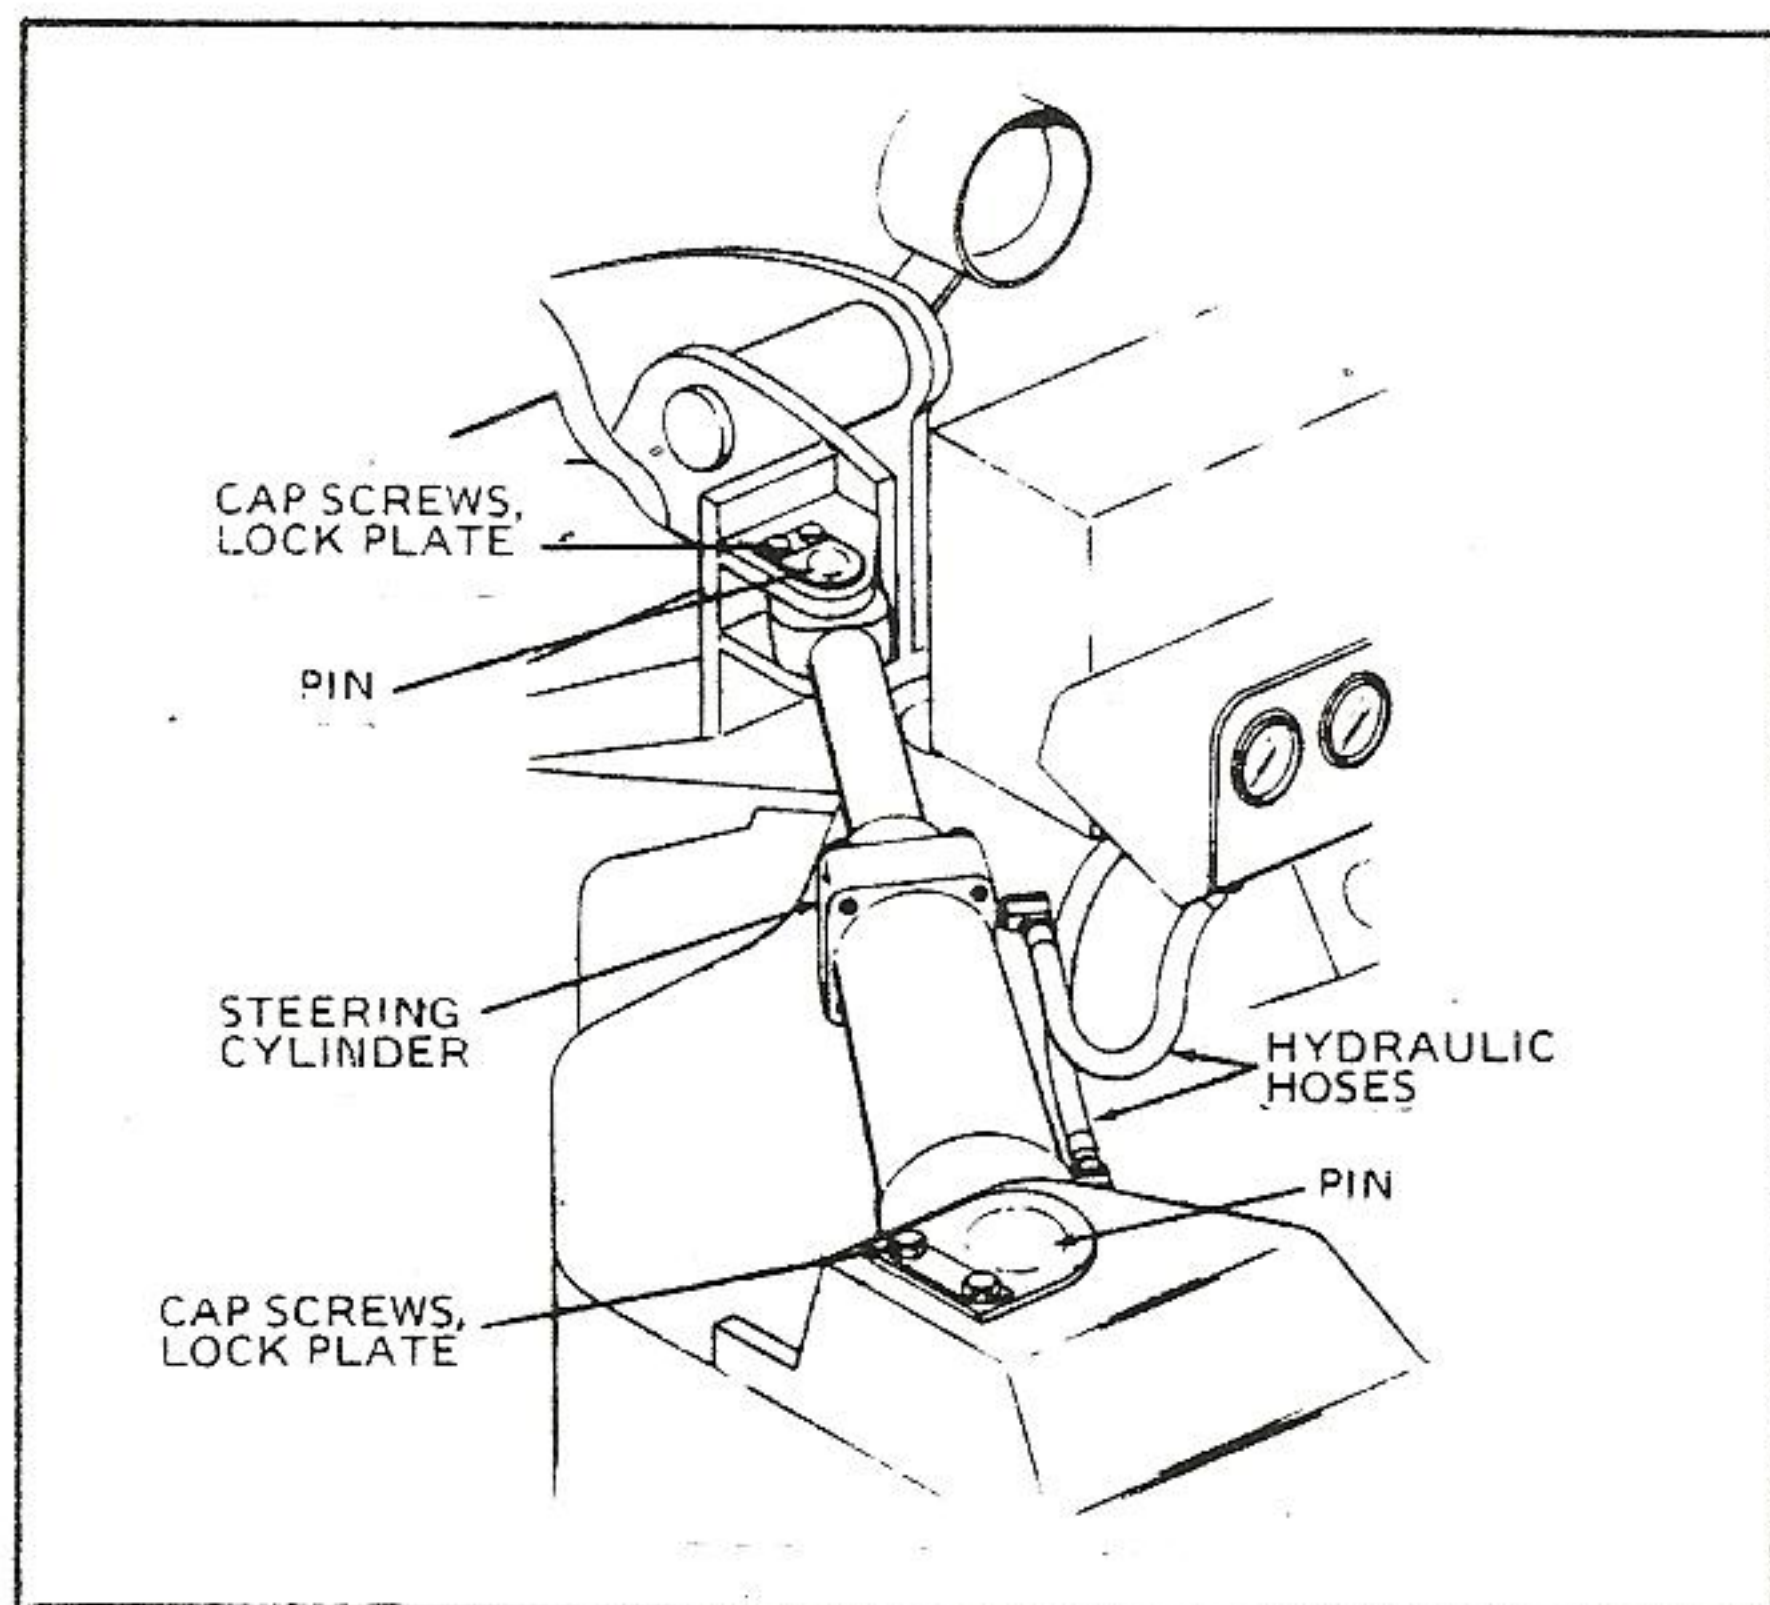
22. STEERING CYLINDER INSTALLATION
